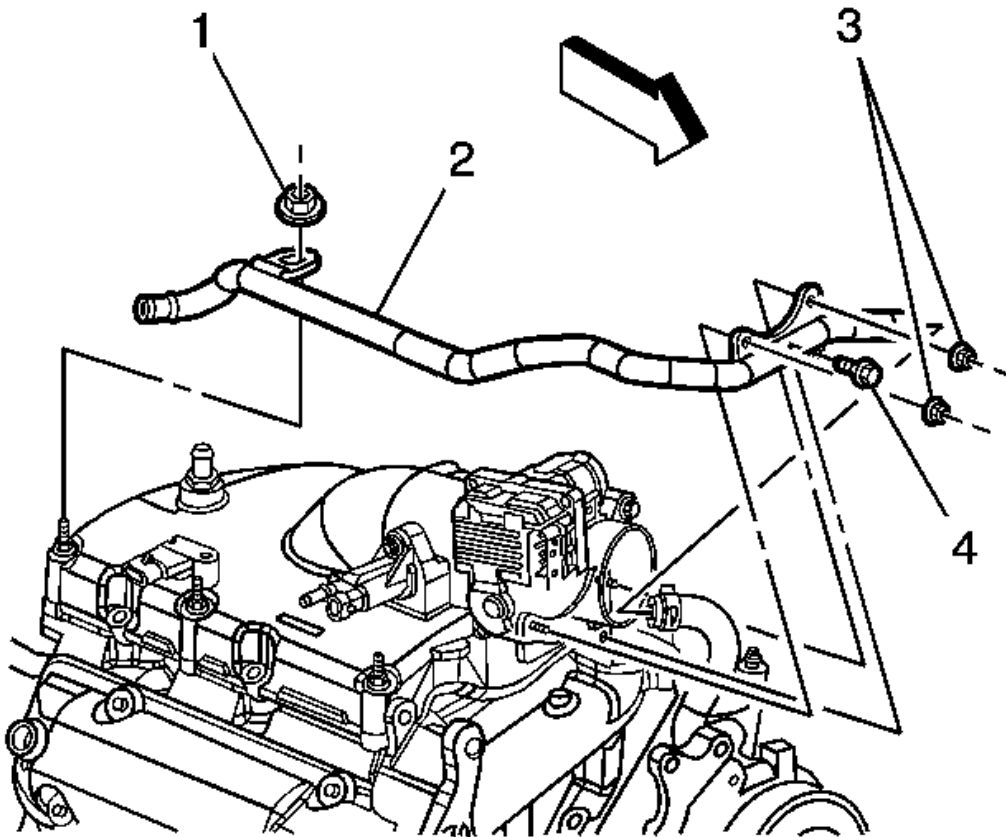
View Of Heater Outlet Pipe, Nuts & Bolts
